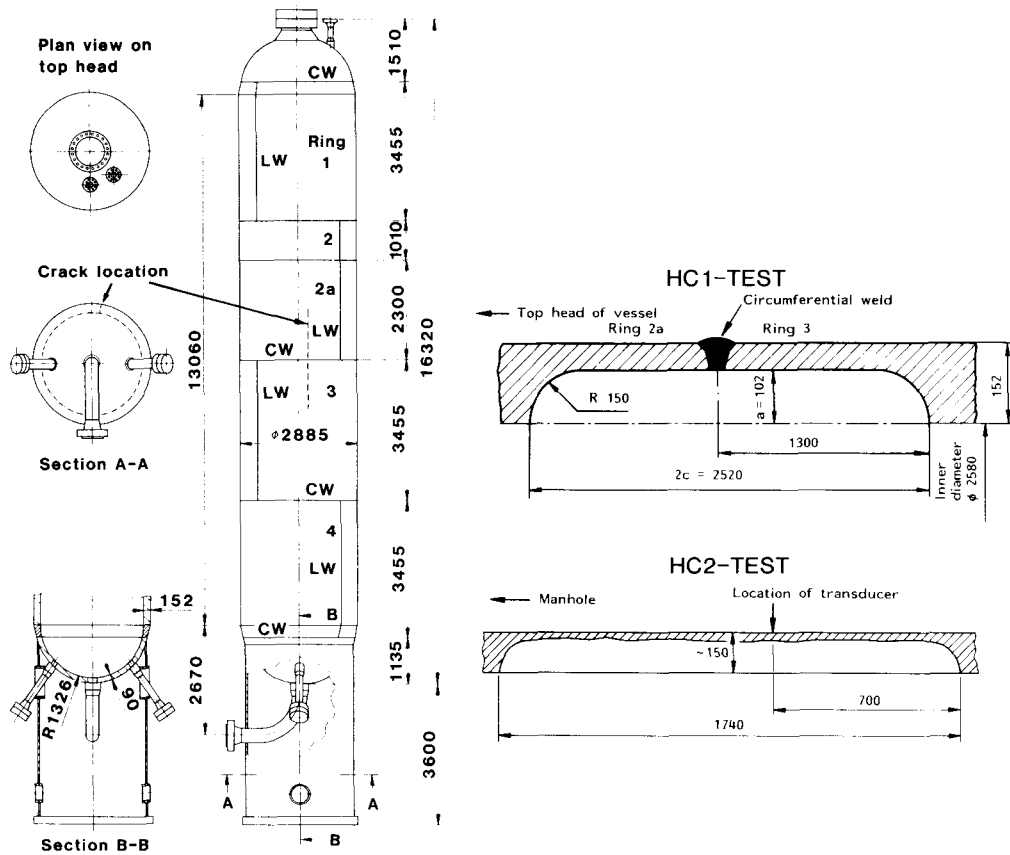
Decommissioned HC-reactor pressure vessel of an oil refinery plant and dimensions of the axial surface flaw produced into the pressure vessel.
